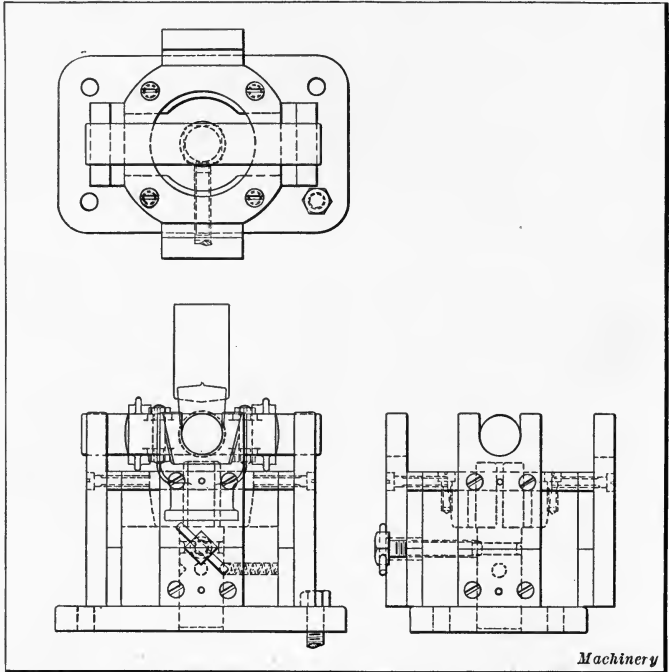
Fixture for Assembling Universal Joint Rings on Drilling Machine as shown in Fig. 12
